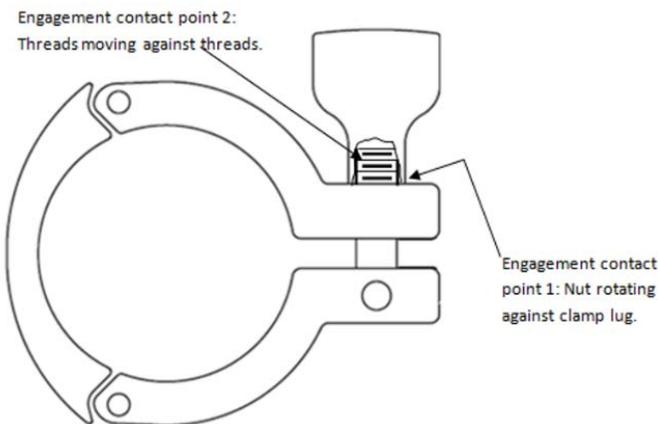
3-Piece Double Pin Clamp Joint Assembly
